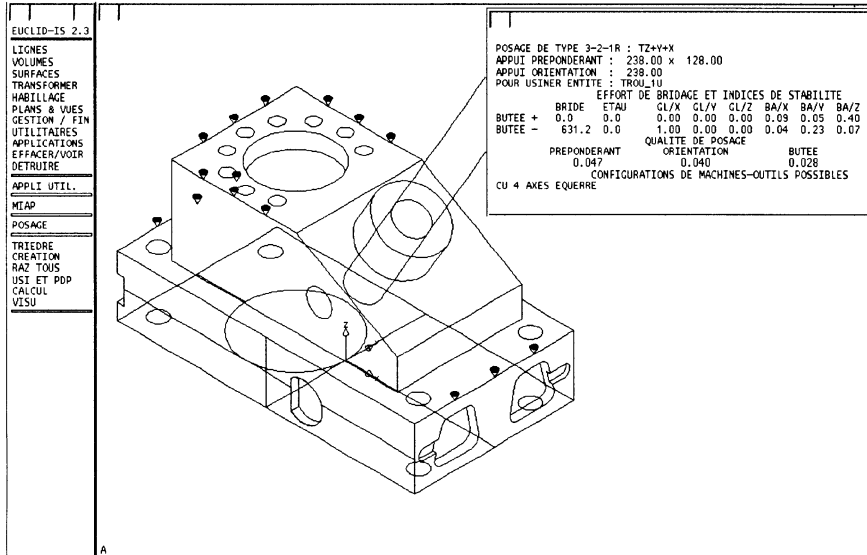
a fixturing feature agrees the machining feature trou_1U.
